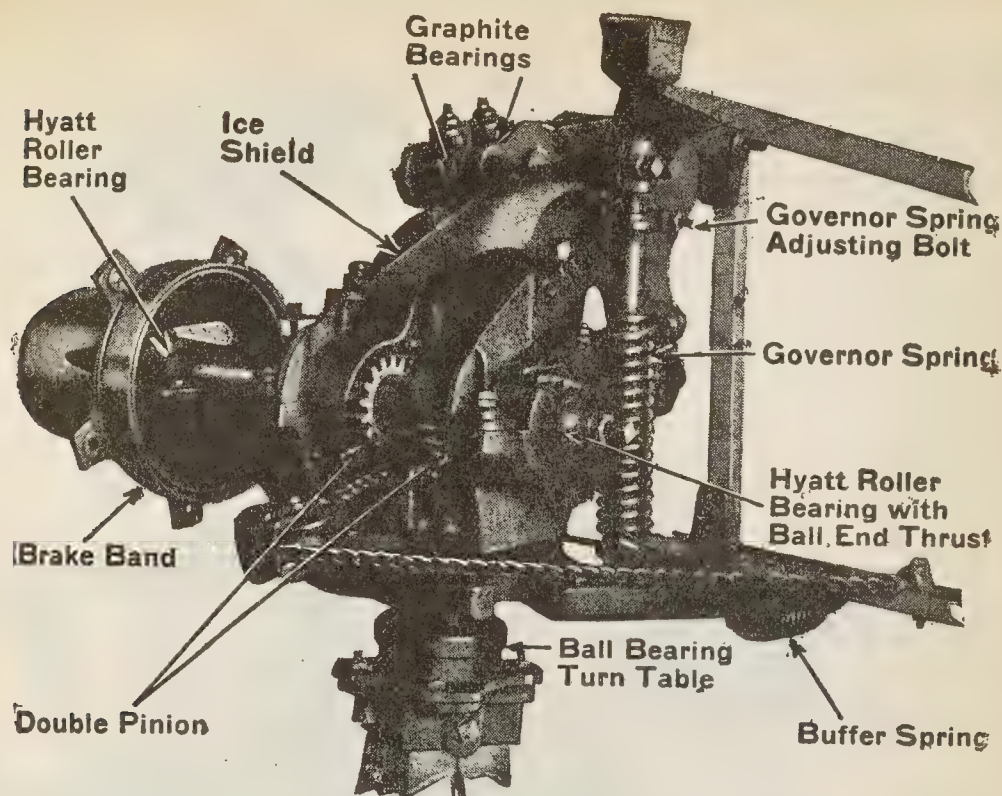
,769.—Samson double geared wind mill; assembled head complete.
